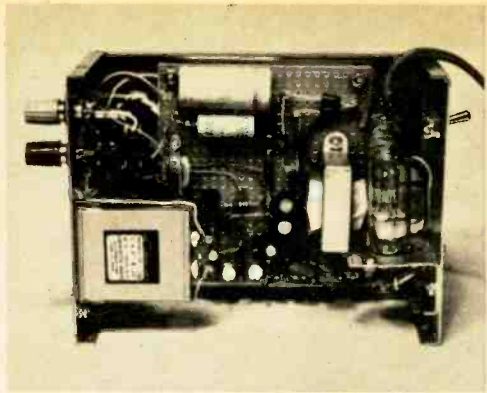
Completed Tele-Spy. Final assembly results in tight quarters. To avoid burning wires when soldering, follow assembly steps in the text.
